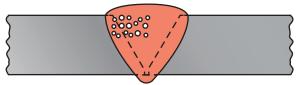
Welding defects with radiographic images. (Continued)
